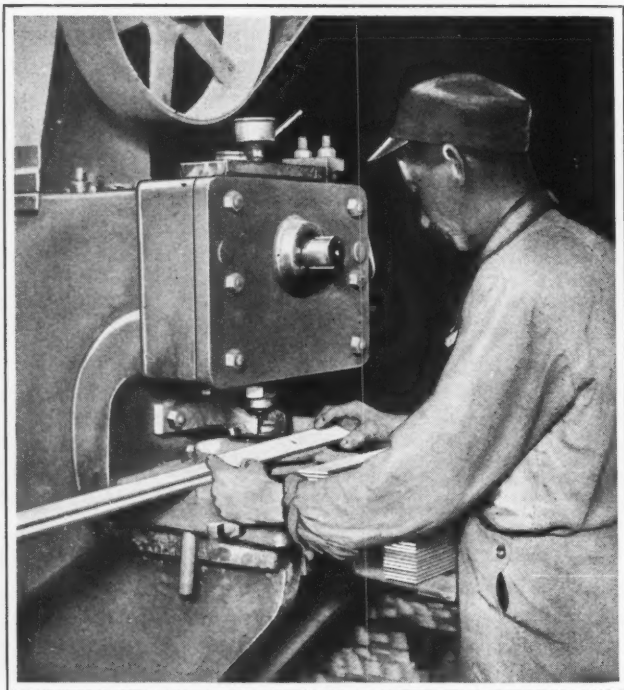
Punching Center Bolt and Clip Rivet Holes
